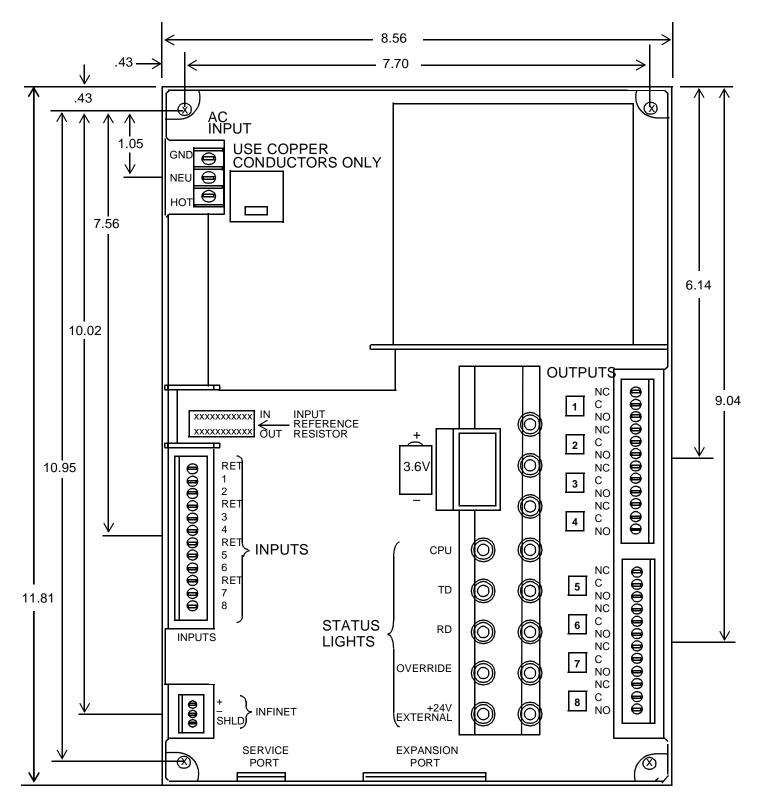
shows the location of the corner screw holes and measurements to all other openings in the cabinet. It also shows the locations of the override slide switches and other parts of the controller. You may want to refer to this figure for assistance during the installation process.
